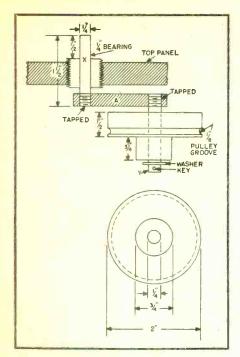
Mechanical details show construction of rewind assembly. A pointer type knob fits over shaft "X" shown in diagram.
